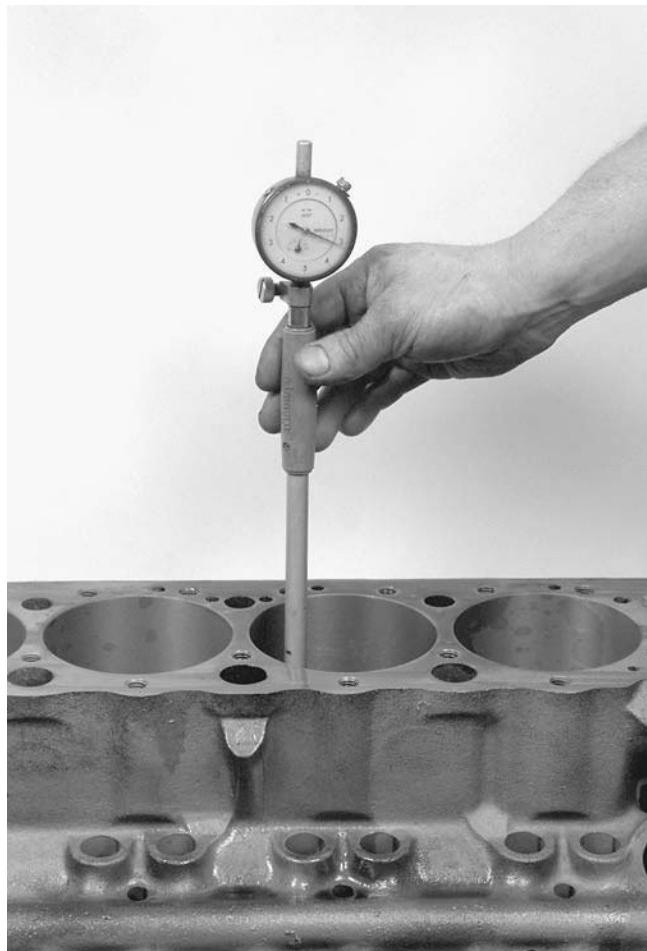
Dial bore gauge being used to measure a cylinder bore. (Courtesy of Sunnen Products Co.)
